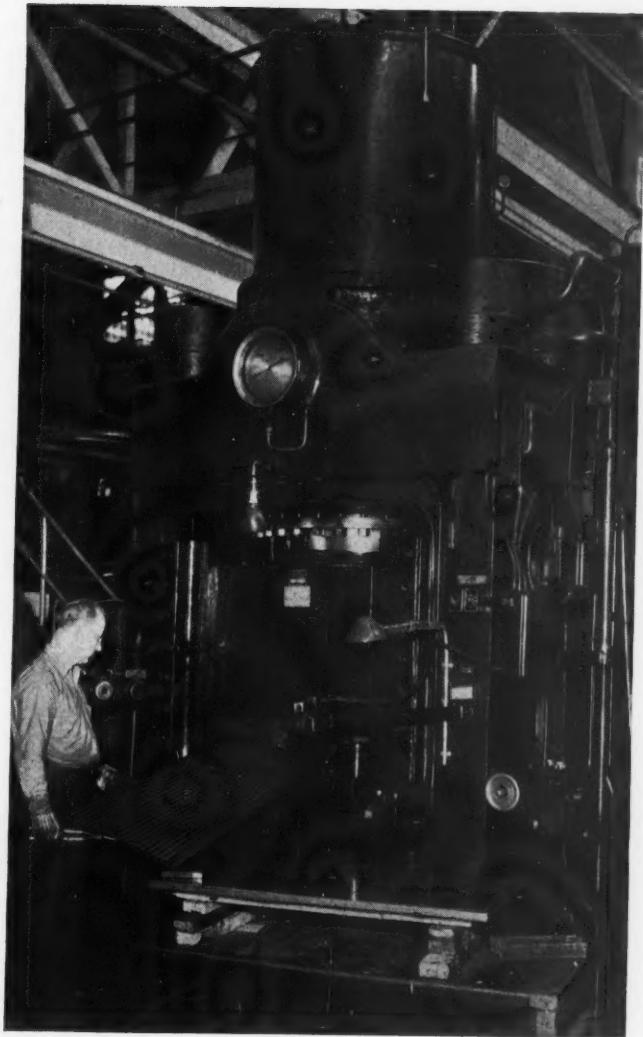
Forming corrugations in refrigerator condenser sheets, for which a 1500-ton H.P.M. Hydraulic Press is used.
